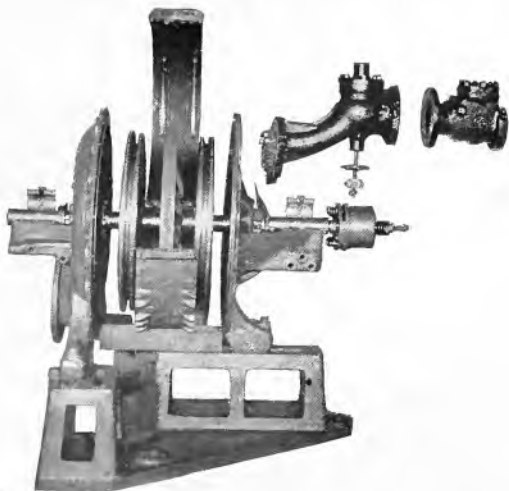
Partially Disassembled Mechanical Drive Turbine
